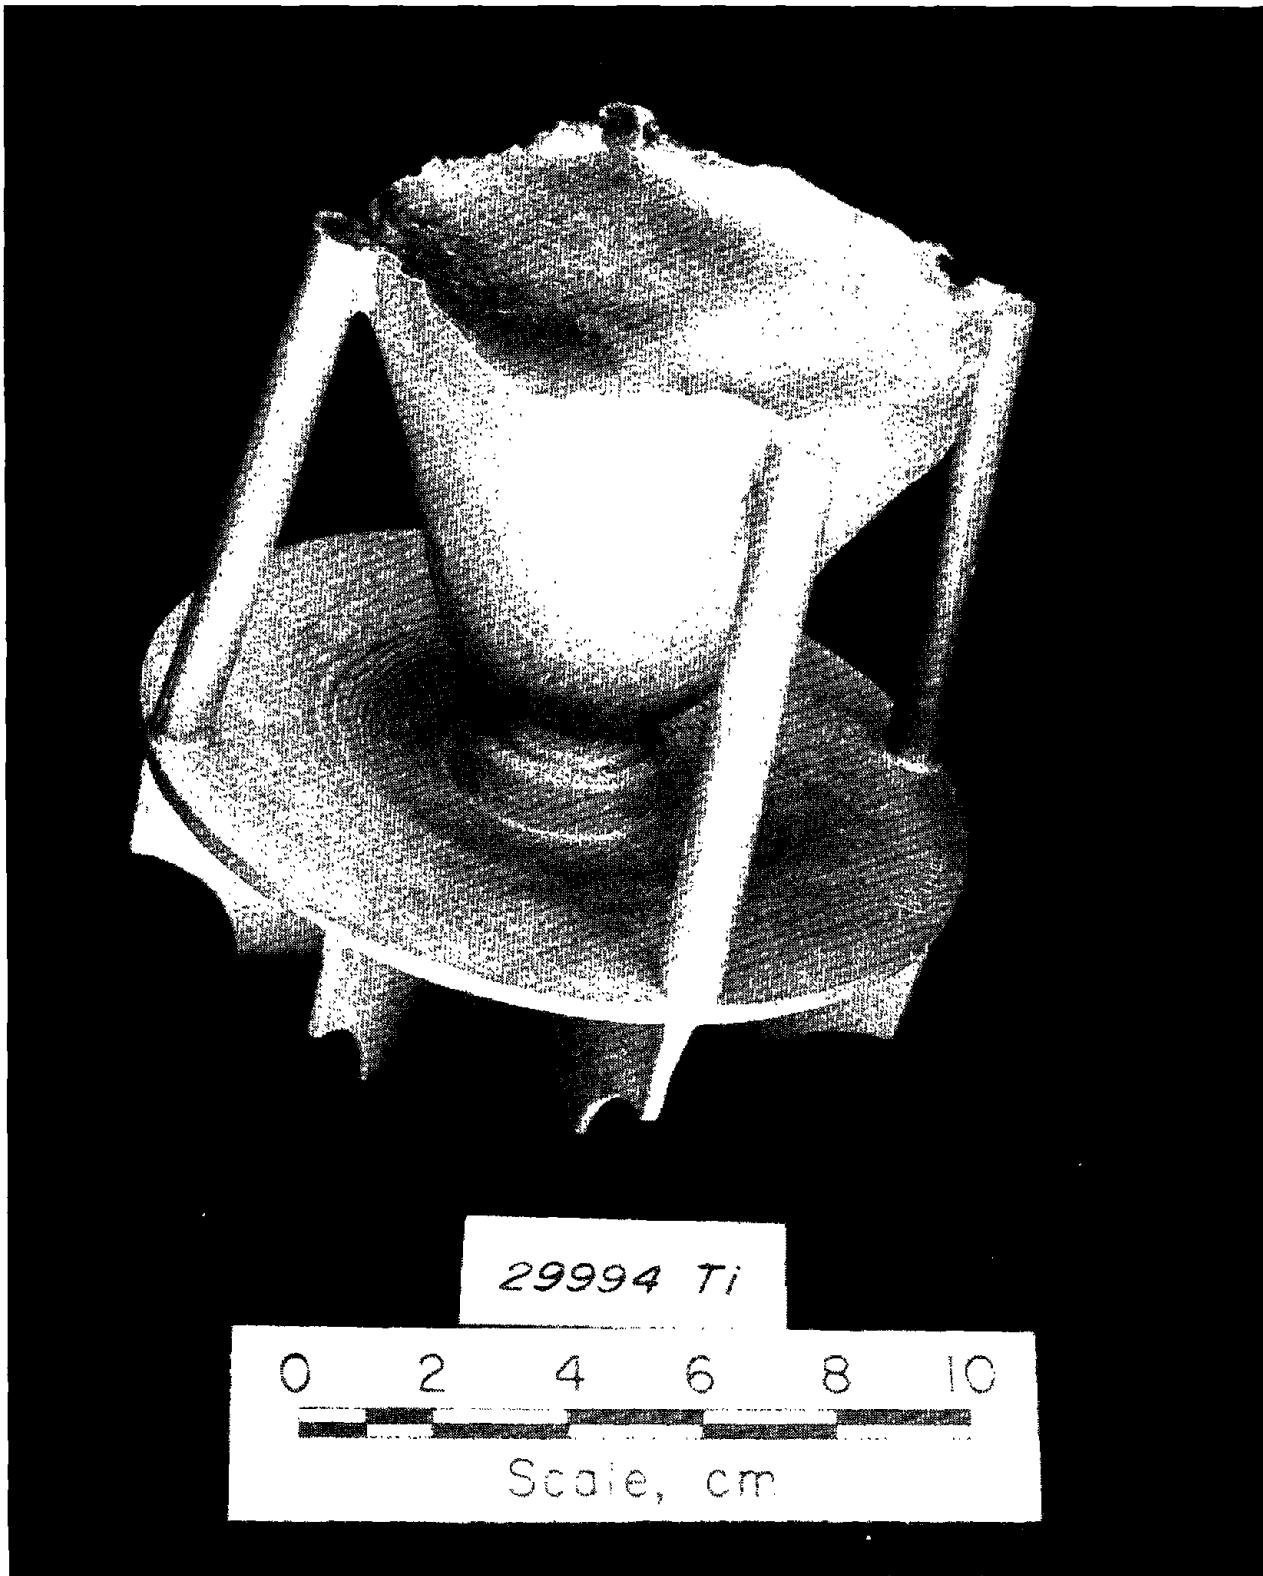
Typical static-cast integral turbine wheel-blade assembly.
